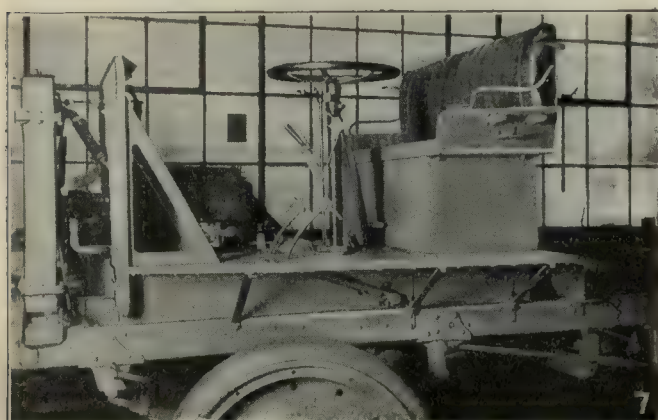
THE SEAT AND PLATFORM MOUNTED
